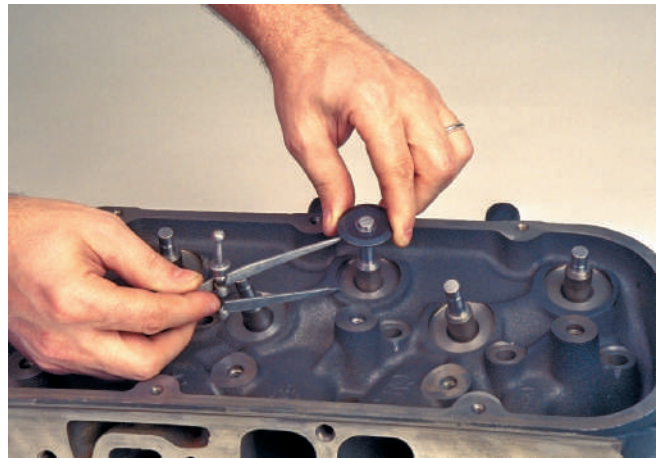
Measure valve spring height before disassembling the cylinder head.
